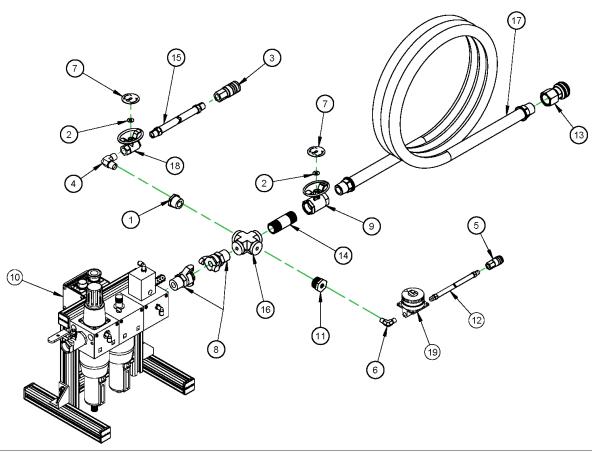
PLUMBING PNEUMATIC FEED ASSEMBLY (P/N 59244)
